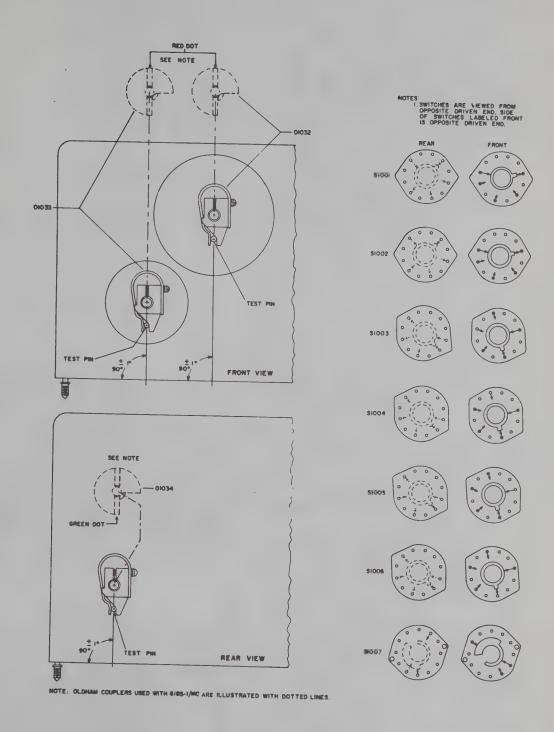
Tuner Subassembly, Switch and Coupler Alinement
